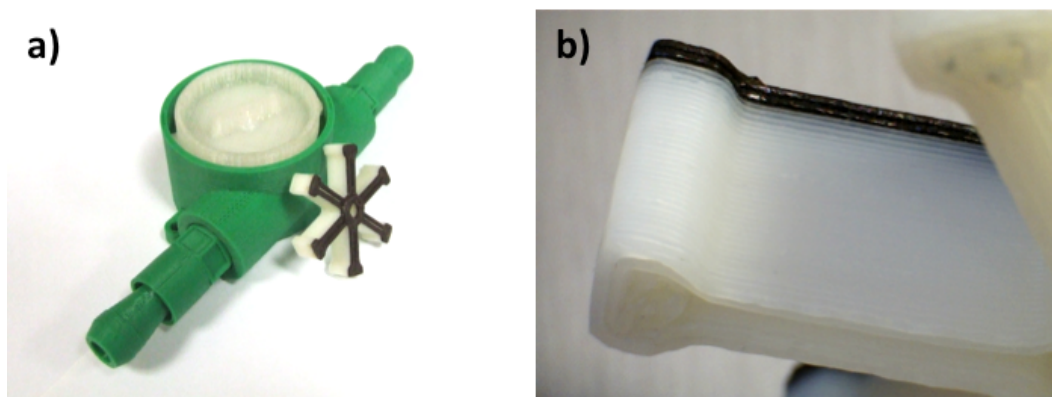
a) photograph of the printed flow sensor and impeller and b) macro image of the printed impeller showing the interface between the formulated composite and the ABS material.
